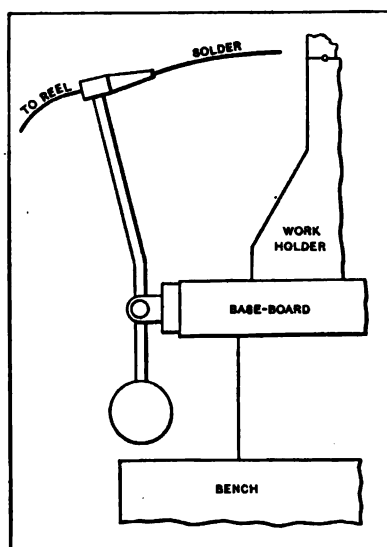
Bracket for Supporting Solder Holder on the Machine
